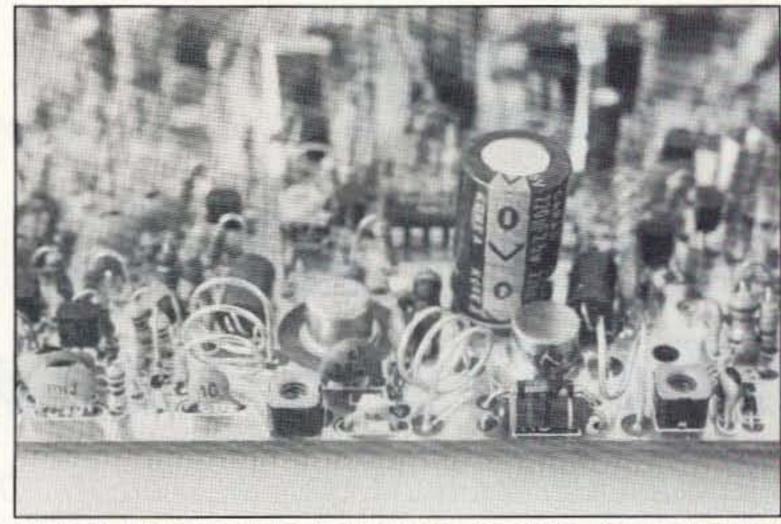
Photo D. Close-up of the final amplifier assembly, showing the trimmers and output coils.
